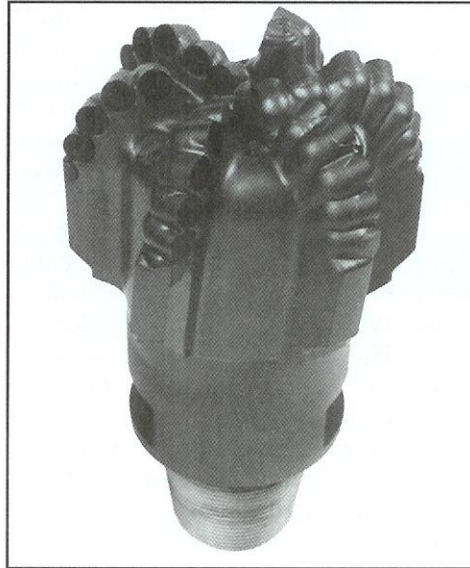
An example of a high performance cutting tool used for oil and gas exploration. This 222 mm (8.75 in) diameter body is formed from WC and infiltrated prior to the addition of the polycrystalline diamond cutters, which are diamond sinter bonded to WC-Co substrates. This heavy P/M² product has only a few pieces buried in the body that are not produced from powders (photograph courtesy of Anthony Griffo).
